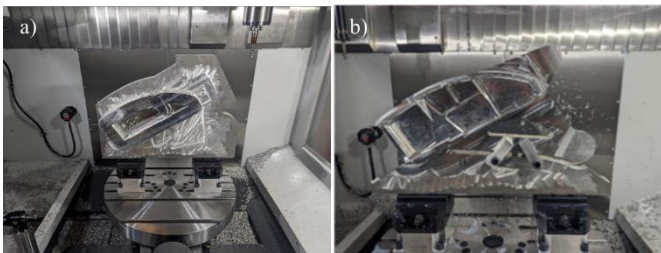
a) Preform clamped on the five-axis machine tool before machining. b) Additional clamps secured the part during cut-off.
